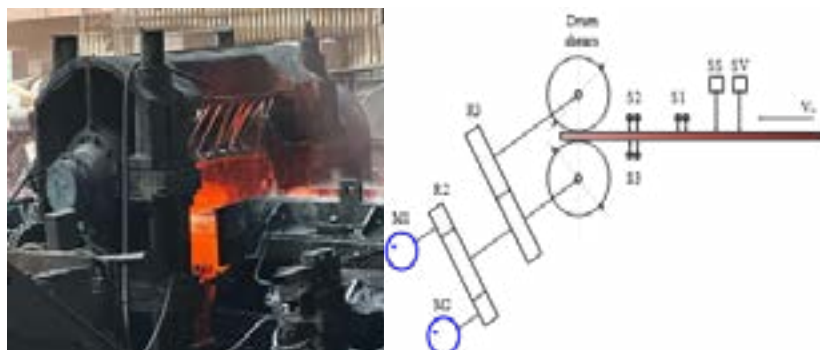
General view of drum shears (a), process flow diagram and electromechanical equipment layout diagram (b) of drum shears of the hot rolling mill «1700»: S1, S2 – existing strip presence sensors; S3 – strip presence sensor (DELTA IRIS); SS – lane presence sensor (DELTA Rota – Sonde); SV – lane speed sensor (DELTA Velas DL 4068); VS – strip speed
